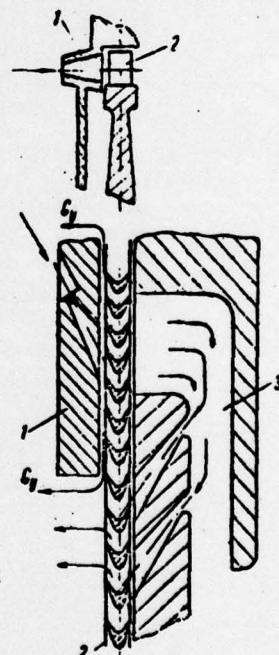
Pressure stage with re-supply (steam supply from two sides). 1 - nozzle; 2 - moving blades; 3 - rotating chamber.
